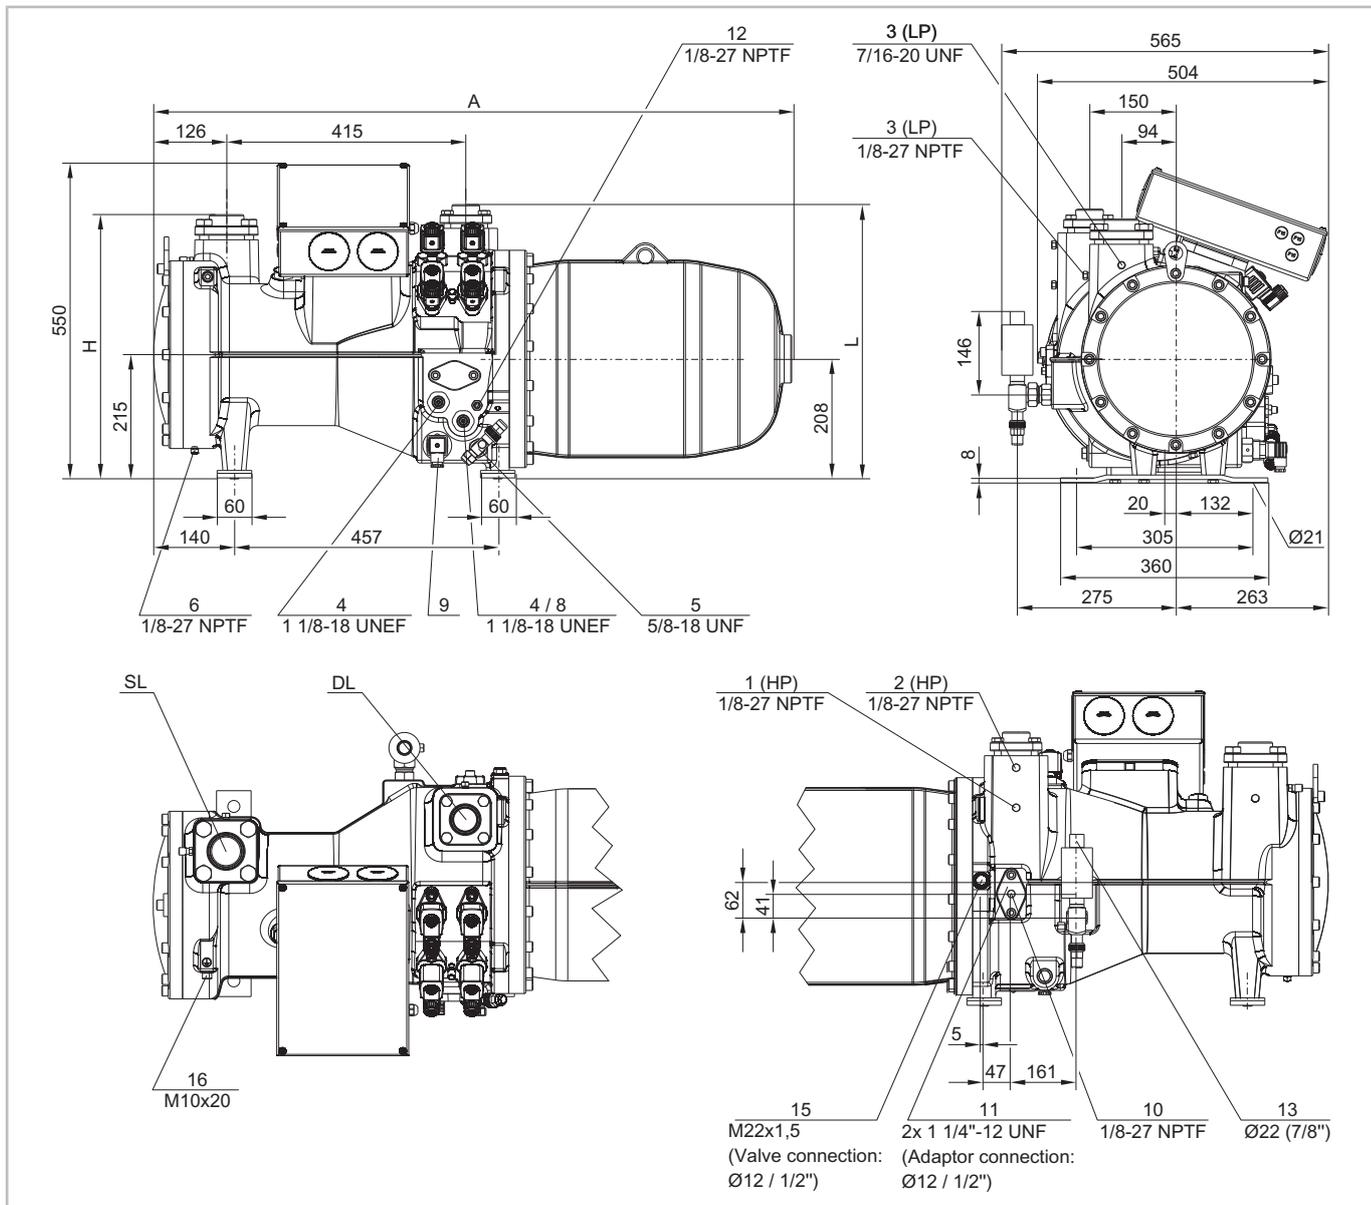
Dimensional drawing CSH6553-35Y .. CSH6593-60Y, CSK6153-50 .. CSK6163-60
